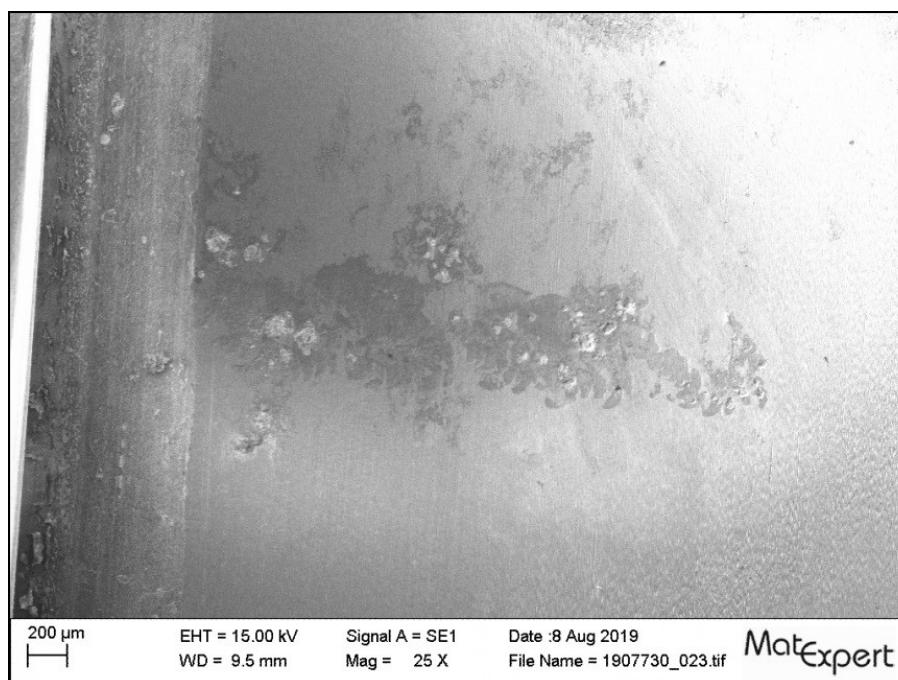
Bearing no. 4, outer-race bearing track – filiform corrosion and pitting with cracks.
